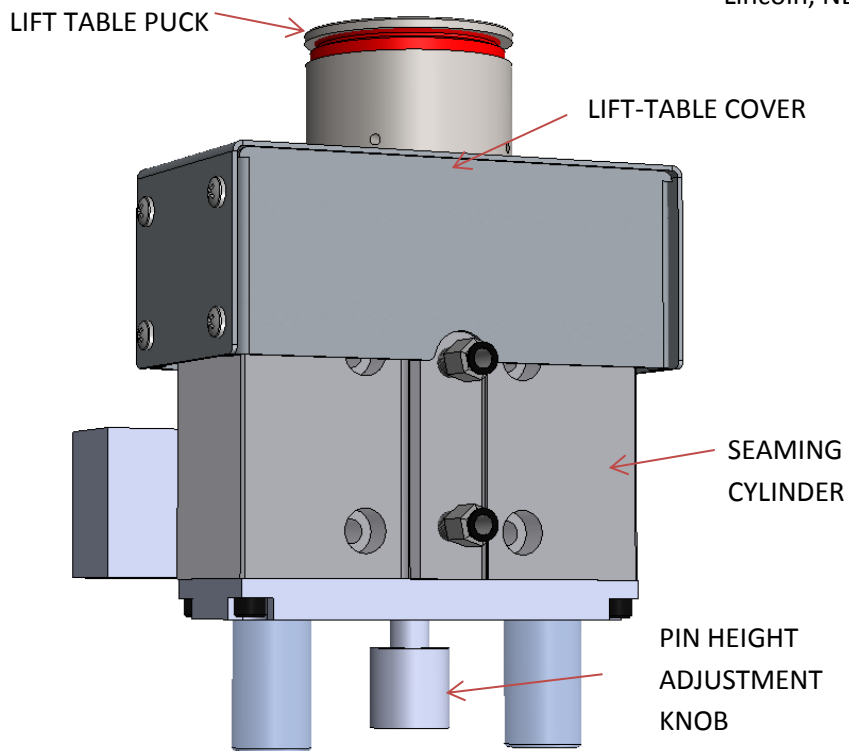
Lift Table Assembly. The lift-table puck height (pin gauge height) can be adjusted by loosening or tightening the adjustment knob.
